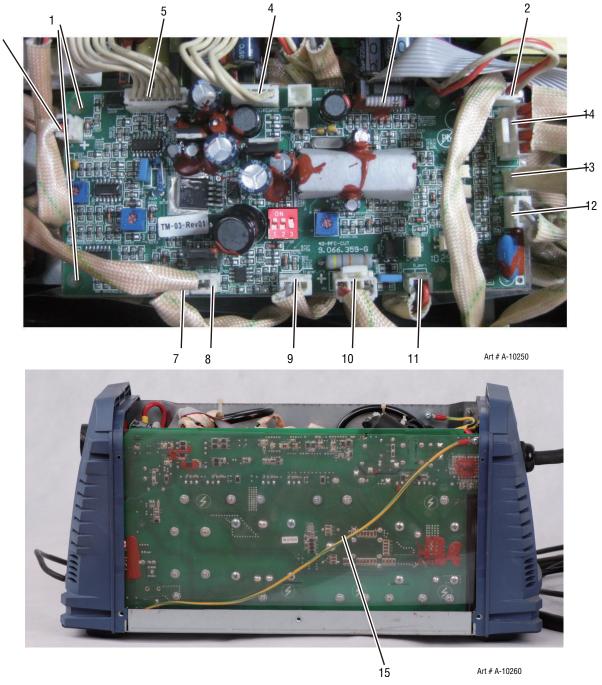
Installing Main Control PCB and Clear Cover Sheet
